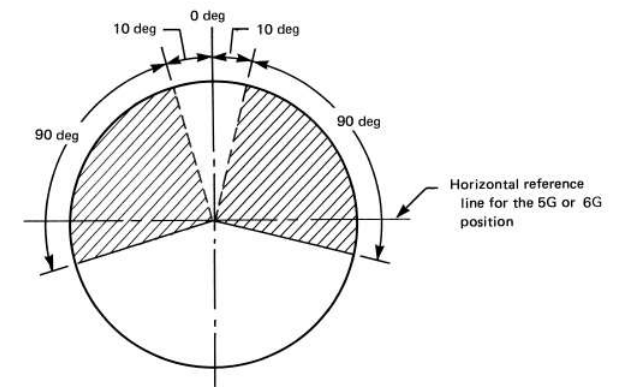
Schematic depicting the CTOD specimen removal locations.
